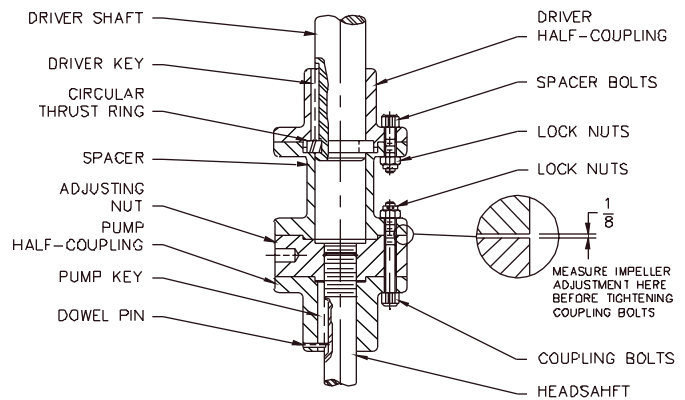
#1 Thru 4 Adjustable Flanged Coupling (Illustrated with Spacer)
